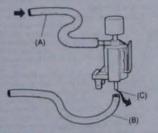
Shutter valve diaphragm three-way solenoid valve operation (Sec 14)
